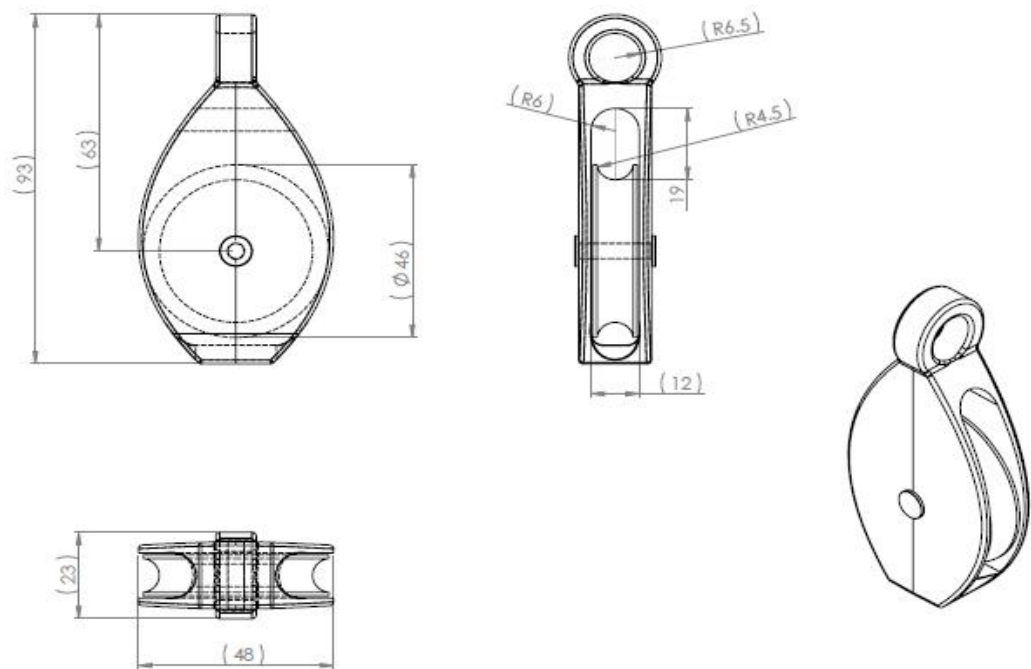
Steel Pulley Technical Drawing (All units in millimeter)
